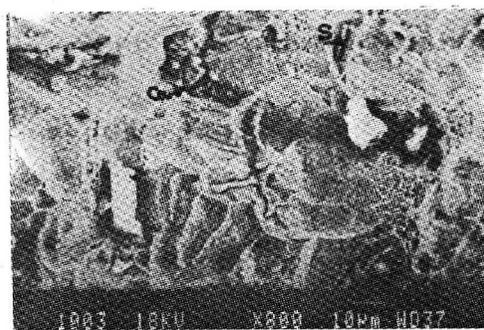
SEM of valve material showing brittle fracture and presence of high 'S' & 'Ca'
